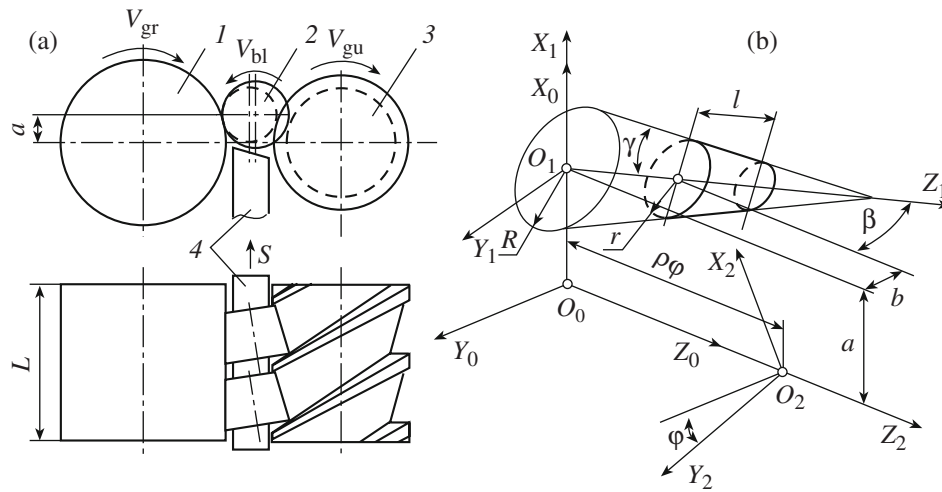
Centerless grinding (a) and guide-wheel configuration in machining conical surfaces (b).
